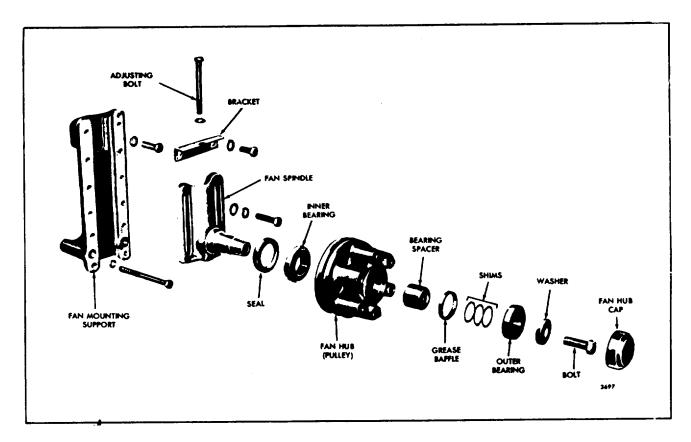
Typical Fan Hub and Spindle Details and Relative Location of Parts (6V and 8V Engine)
